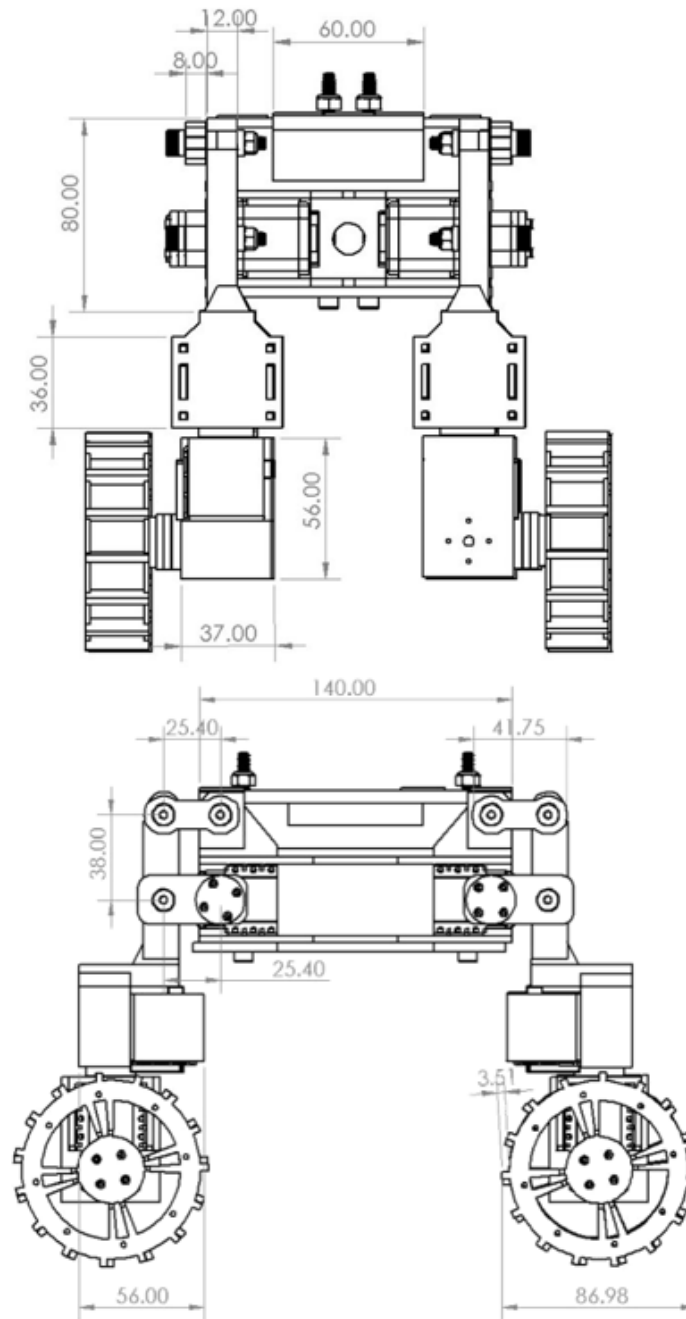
Engineering Sketches of the Mini Rover Front view and side view engineering sketches of the Mini Rover. Dimensions are in millimeters. Rover design by Siddharth Shrivastava [66].
